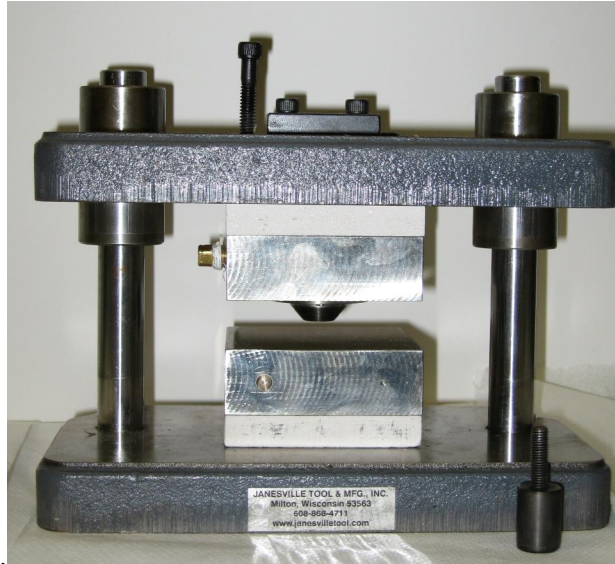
Assembled embossing tool comprising a hot plate (upper) and a cold plate (lower), fastened to a platen set.
